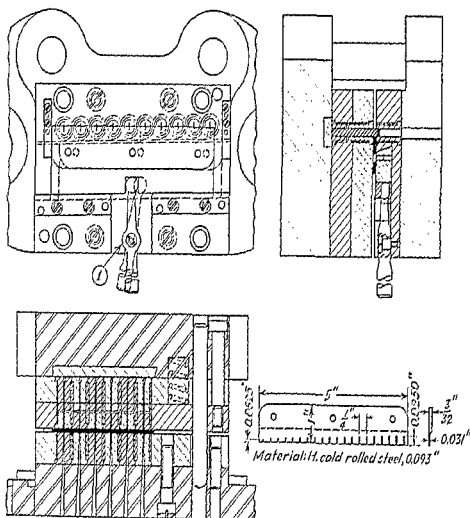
Notching die with lever for shifting workpiece.¹
